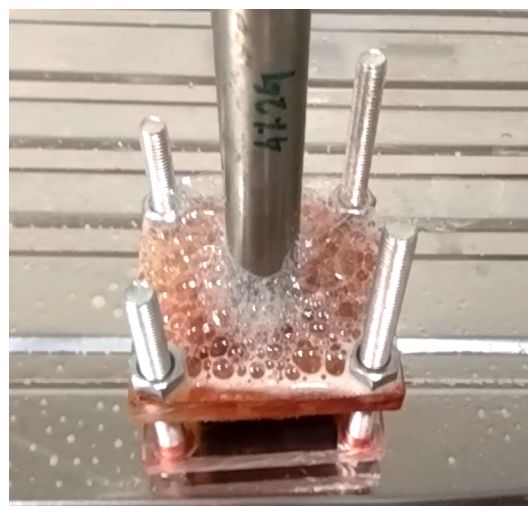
Leak in a mockup tube-to-tubesheet joint detected using bubble test.
